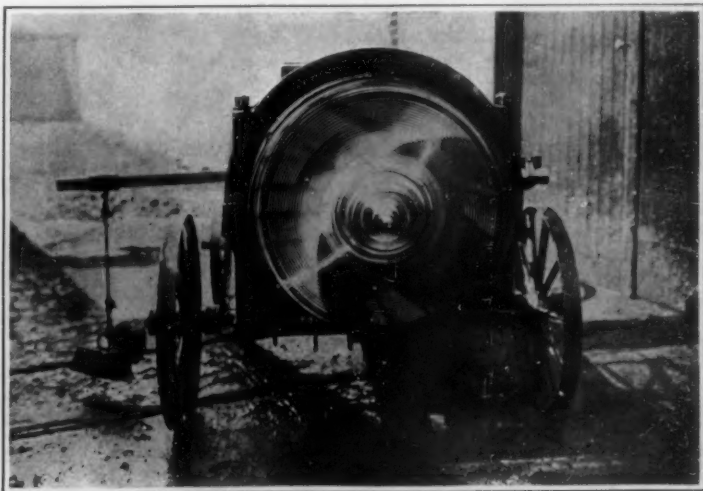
Method of testing at the Gnome factory. The completed motor in full movement on a trial truck.
